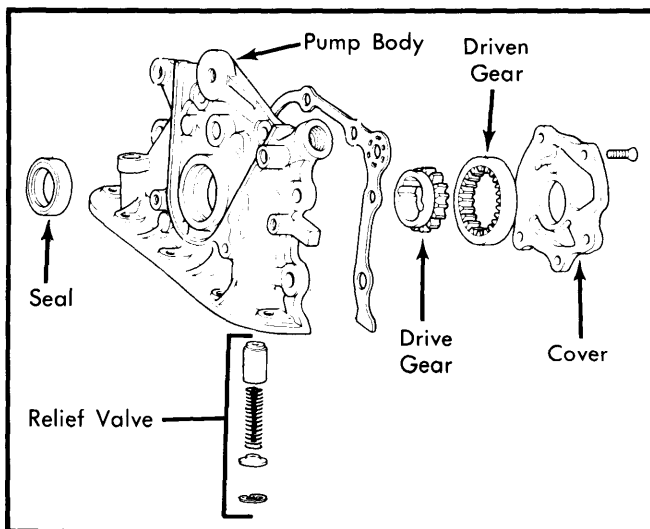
Exploded View of Oil Pump and Pressure Relief Valve Assembly
